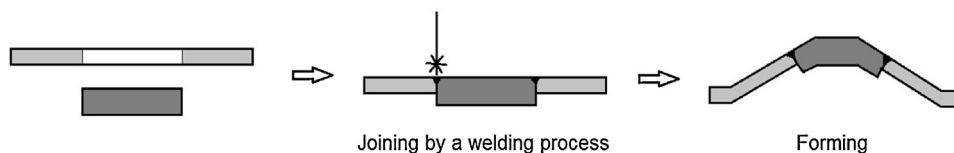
Principle of tailor welded blanks (Lamprecht et al., 2005a).
